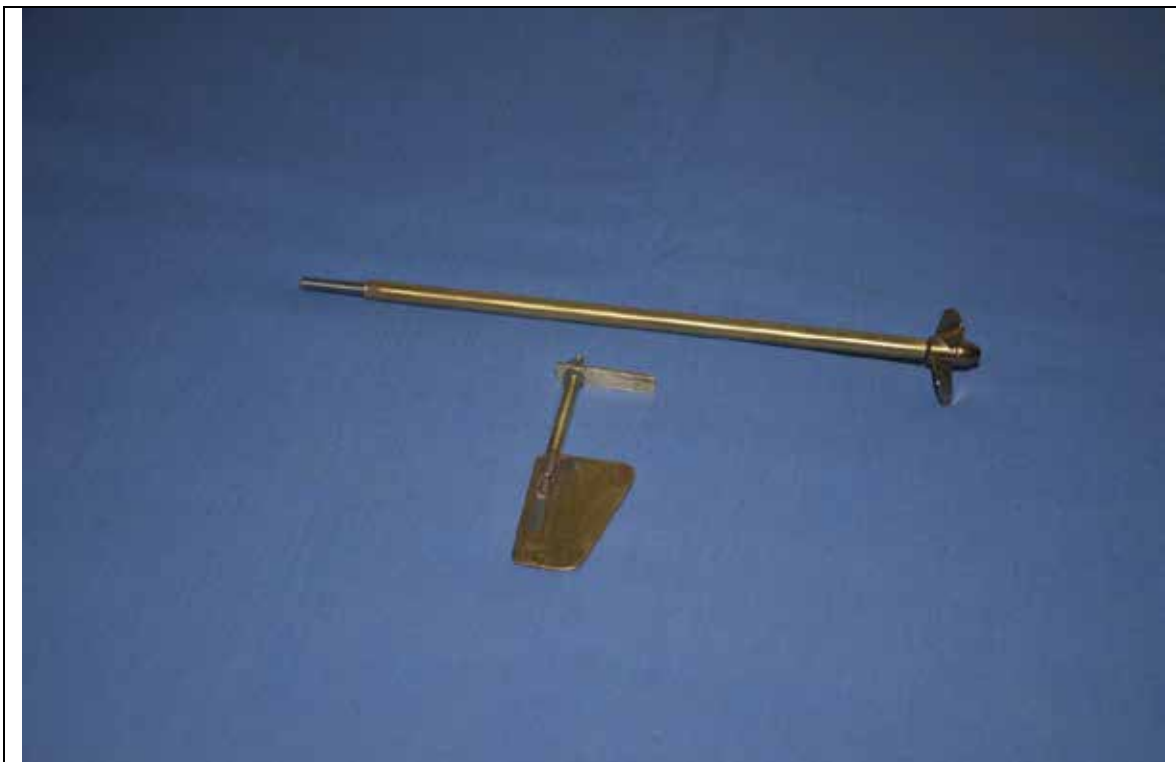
Replacement Propeller/Shaft and Rudder Assembly
